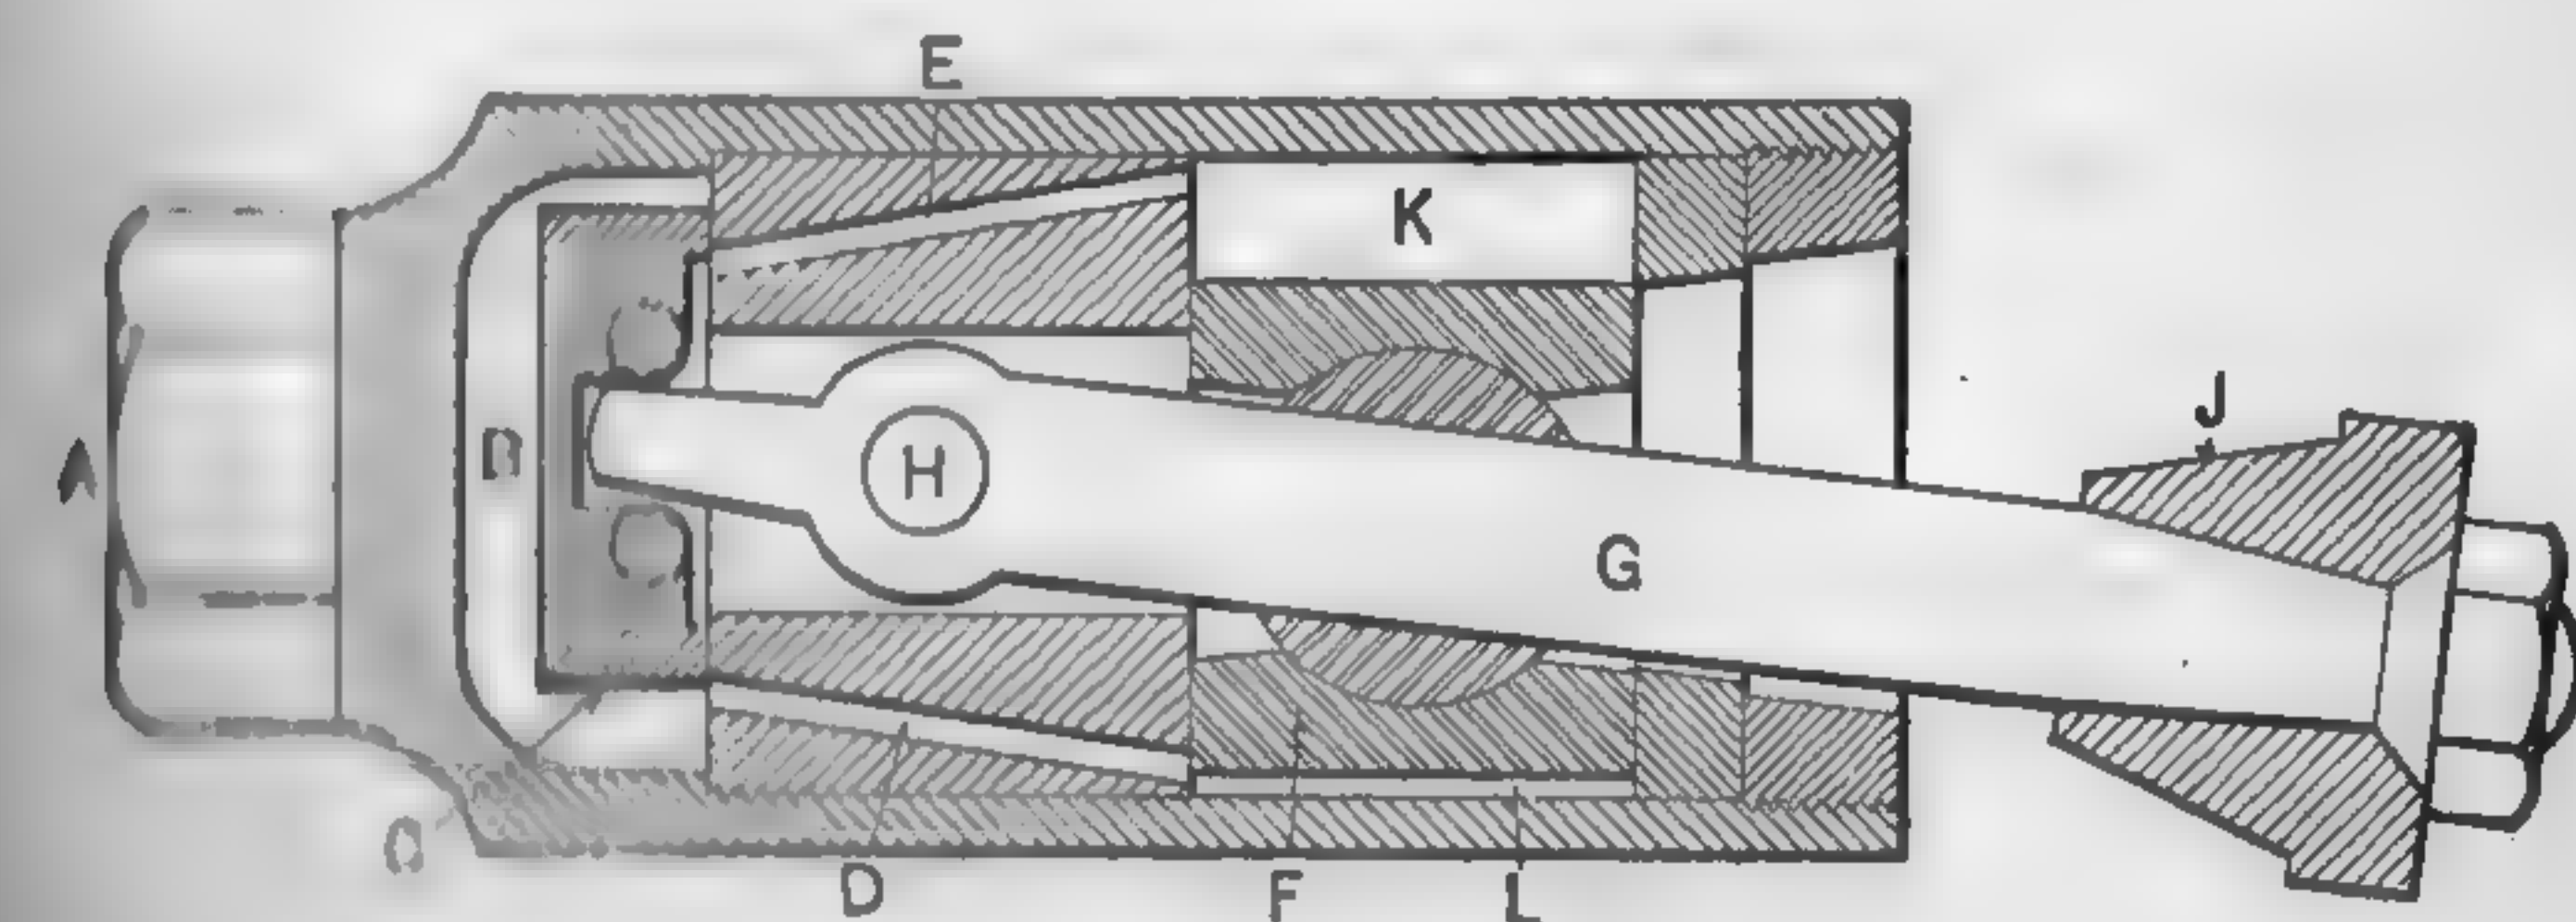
Mechanical Tube Cleaner — Hammer Type.
